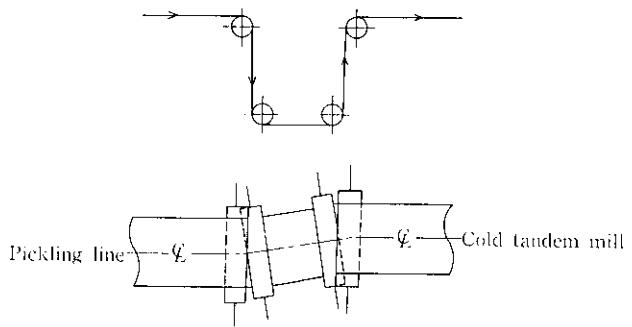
Strip shifting device for coupling of pickling line and cold tandem mill
